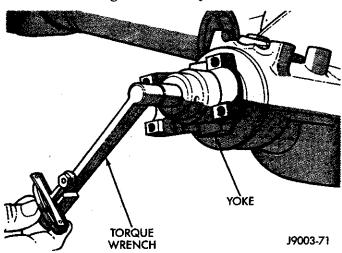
Drive Pinion Gear Shaft Bearing "Preload" Torque Measurement
